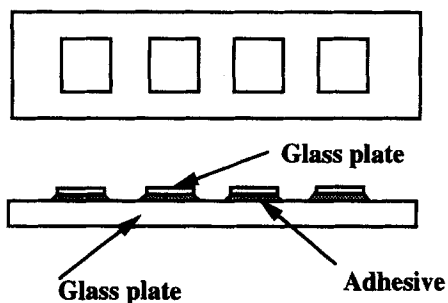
Bonding layer defect test specimen for wet heat treatment.
